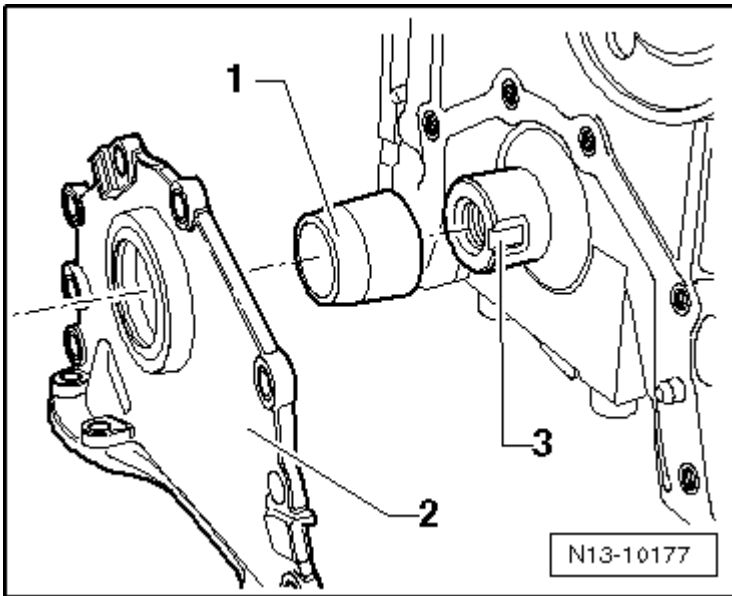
Identifying Guide Sleeve T10215/1, Crankshaft Pin & Sealing Ring
